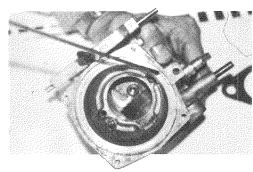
This is the recess into which the tag on the outer edge of the diaphragm fits. Align this and slide the piston/needle assembly into the body of the carburettor.
